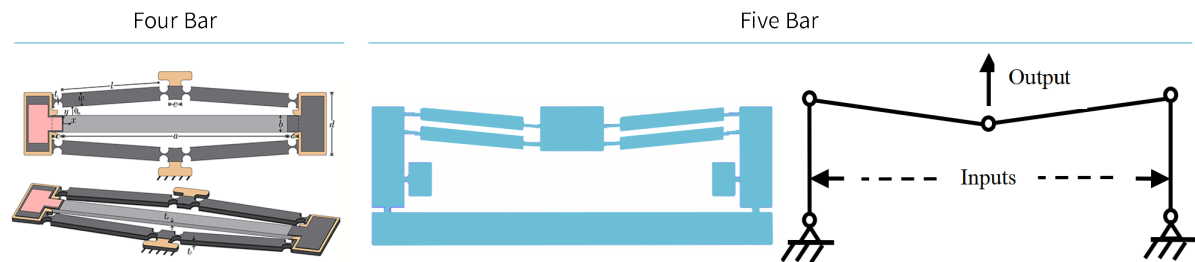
Left) The most common type of flextensional mechanism.[35]. Right) Shows the fivebar flextensional mechanism, which is a combination of flextensional and lever [36].
